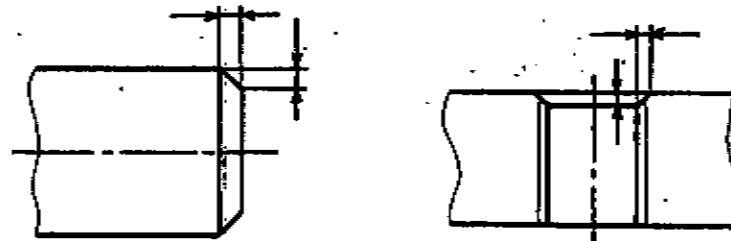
Basic Size for Chamfer Heights for Broken Edge
